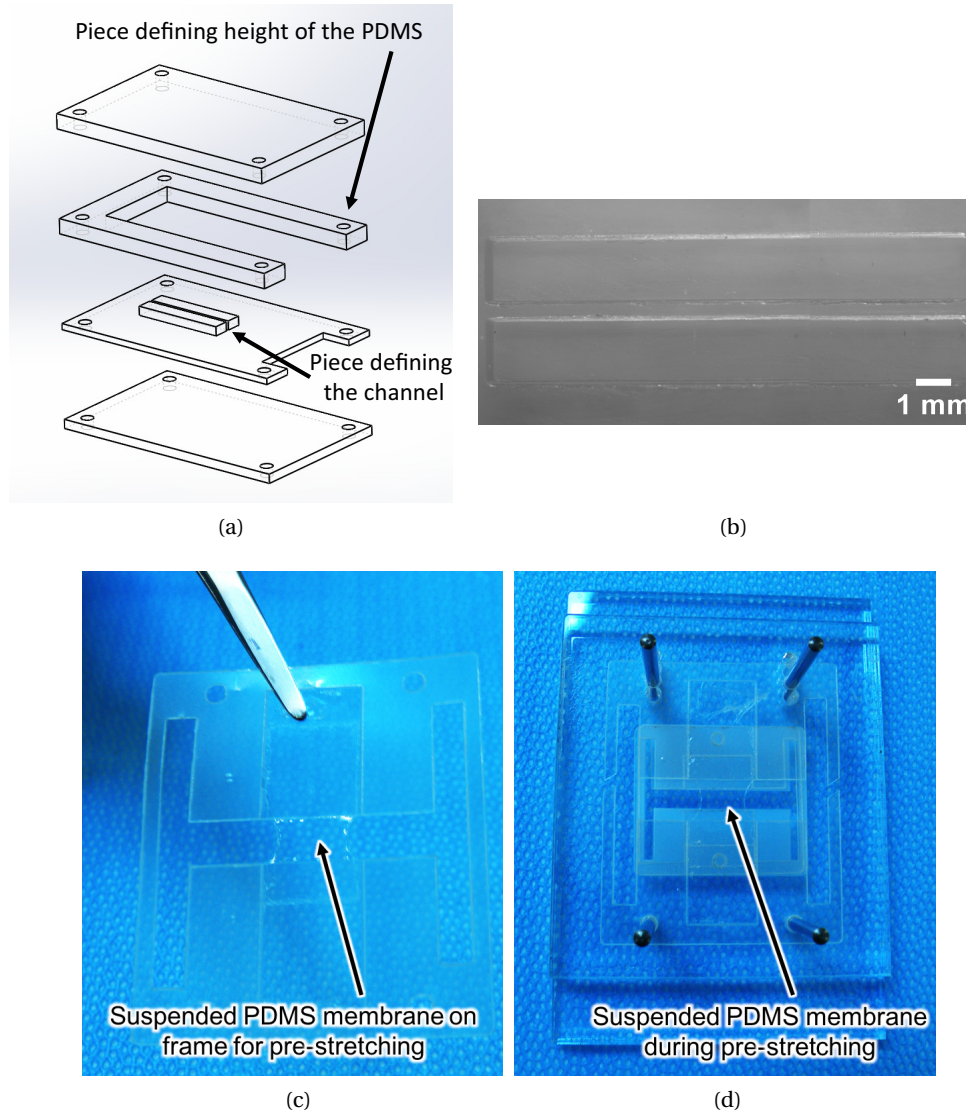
Schematics and pictures from the fabrication process: (a) SolidWorks exploded view of the mould, (b) Picture of the molded bottom part of the device with the two channels parallel channels defining the cell and pressure chambers, (c) Suspended PDMS membrane on a frame designed especially for the pre-stretch, and (d) Picture of the pre-stretching step which is performed by uniaxial elongation of the membrane on a customized membrane stretcher. A new frame is then glued to the membrane to maintain the tension.
